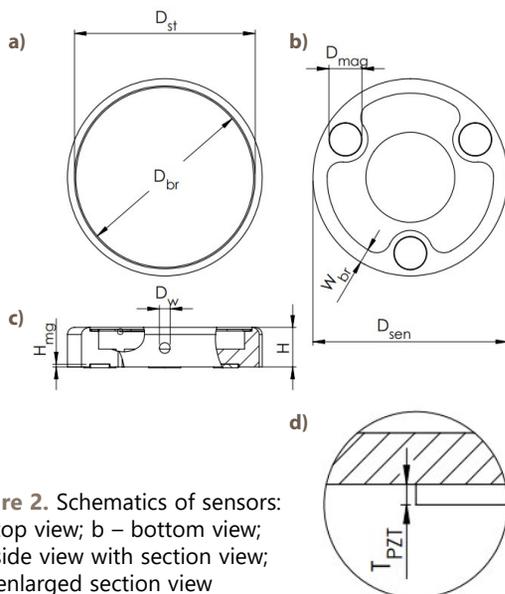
Schematics of sensors: a – top view; b – bottom view; c – side view with section view; d – enlarged section view which represents thickness of piezoceramic disc
